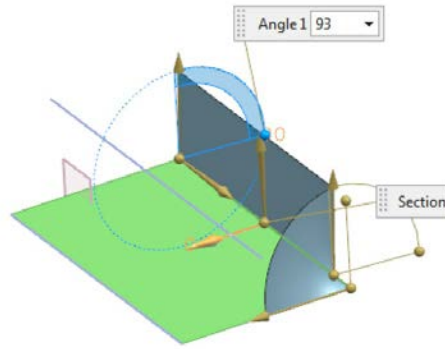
Law extension surfaces with sharp miter at the corner
